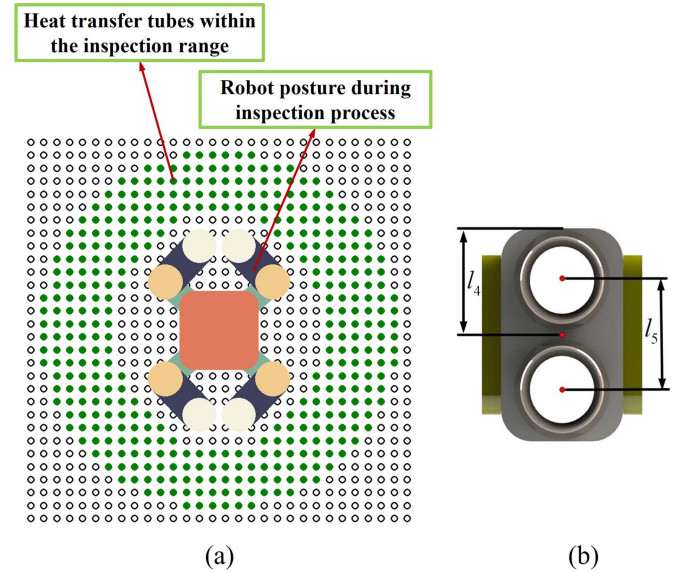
Inspection range, robot posture, and top view of guiding device. (a) Inspection range and robot posture; (b) top view of guiding device.
